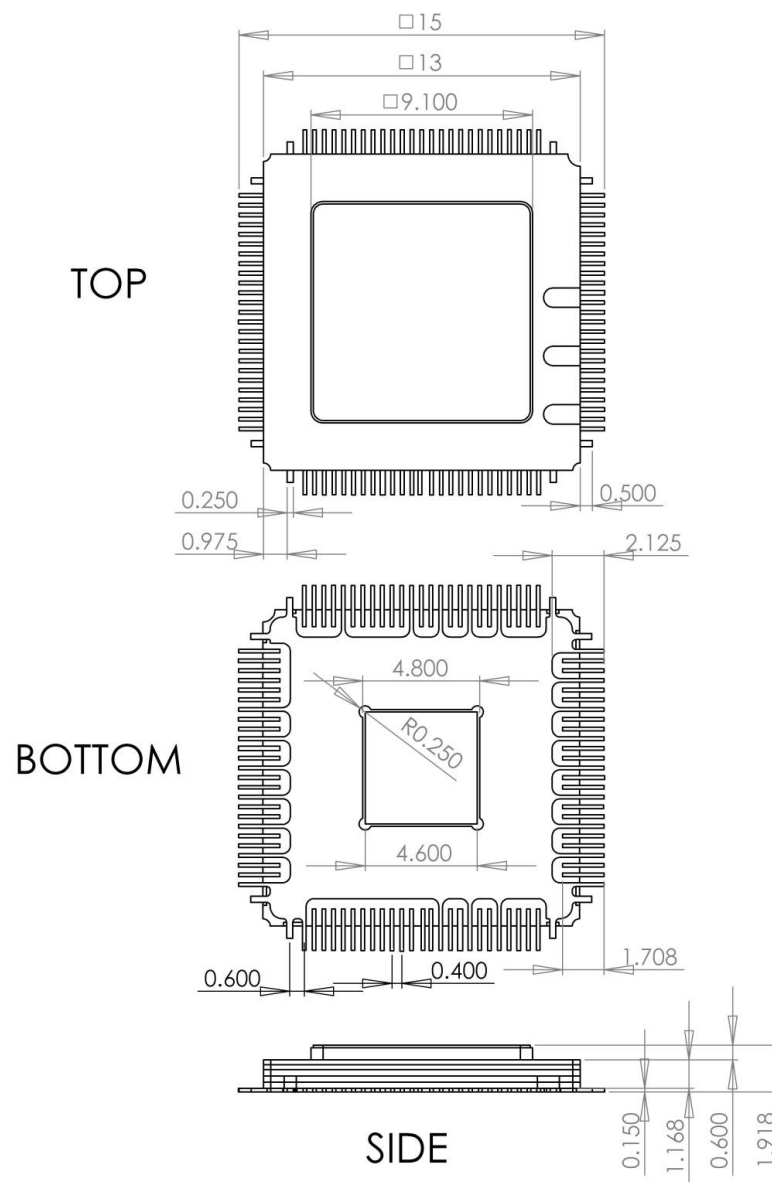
CQFP 100-Pin Package Drawing (All Dimensions in mm)
